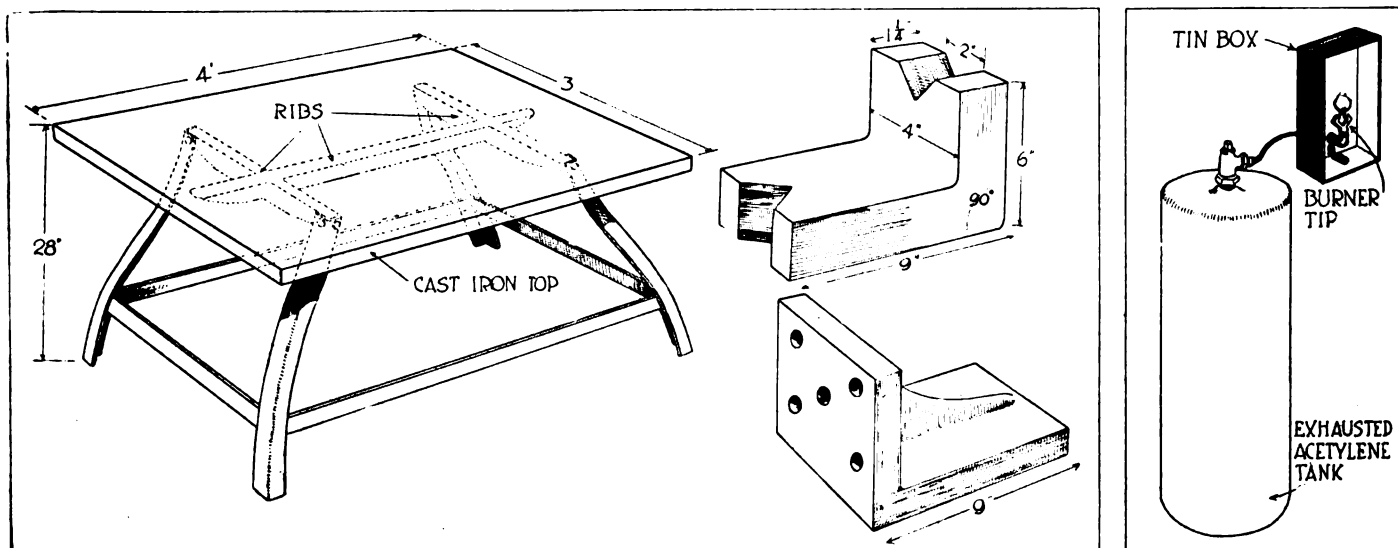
Left—Welding table with cast iron top and angle iron legs. Fig. 2—Upper—Cast iron V block. Fig. 3—Lower—Angle plate. Fig. 4—Right—Pilot light supplied by exhausted acetylene tank
